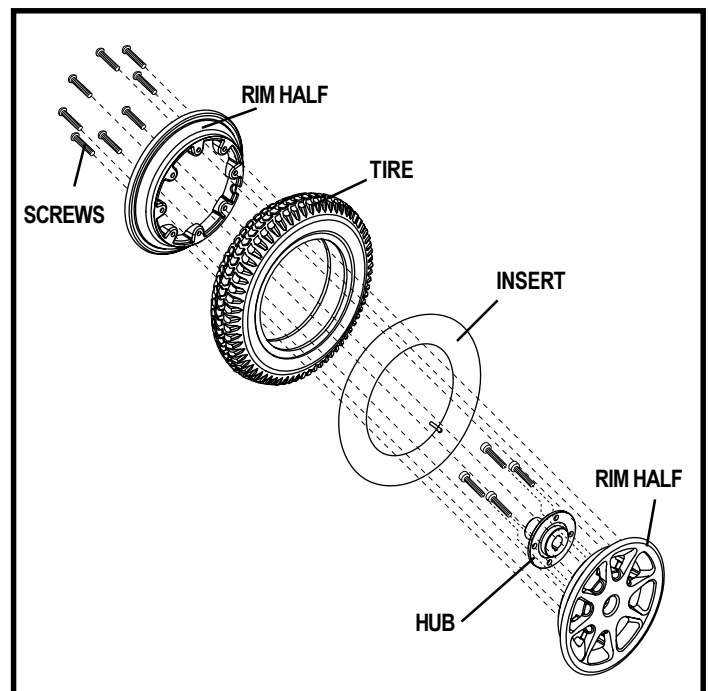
Quantum Jazzy 1650 Wheel Assembly
